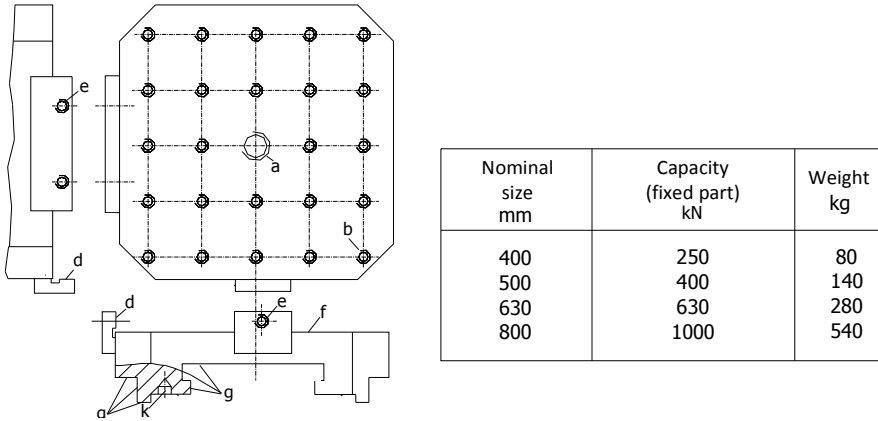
Example of a standard pallet: a - central bore, b - tapped holes for mounting of parts or fixtures, d - side basis plane, e – tapped hole for pallet pulling, f – surface to part mounting, g – guidance surfaces, k – pallet positioning hole
